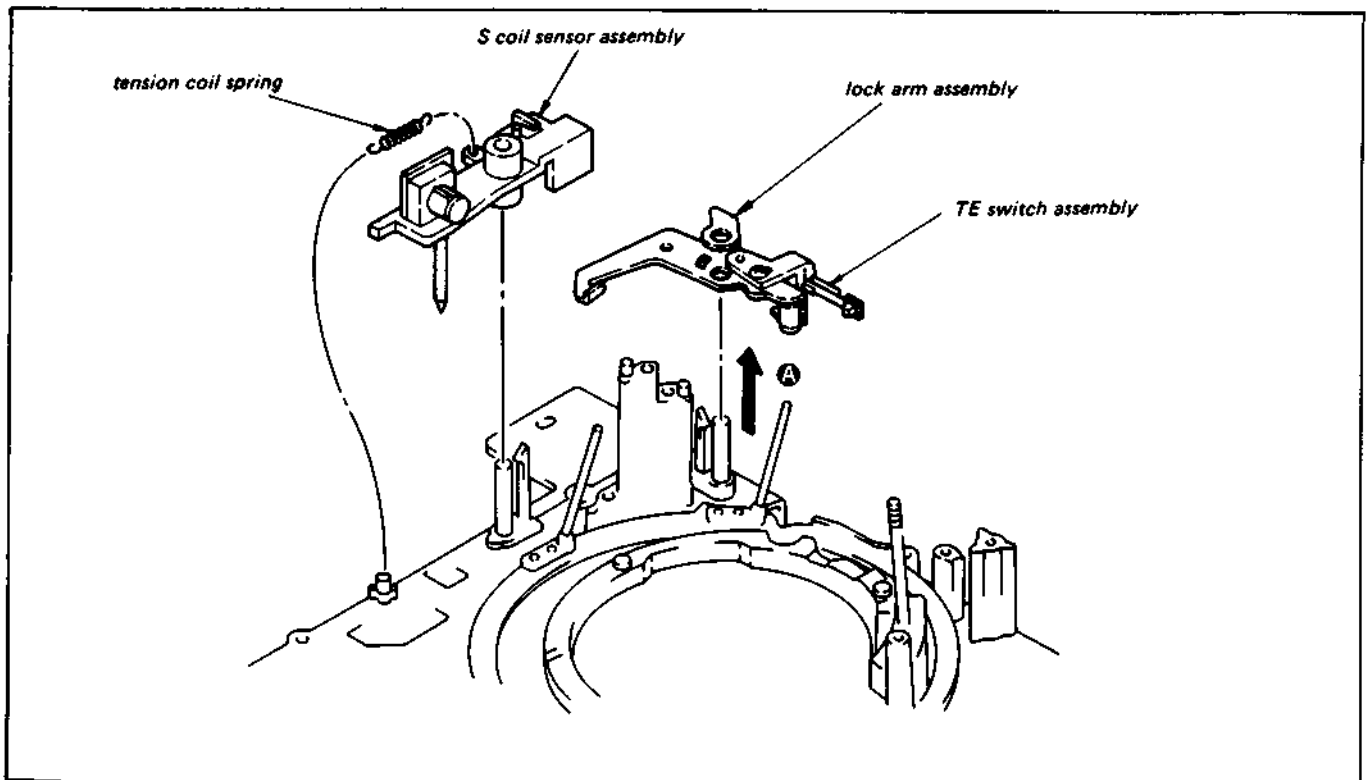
Removal of the TE switch assembly and lock arm assembly
